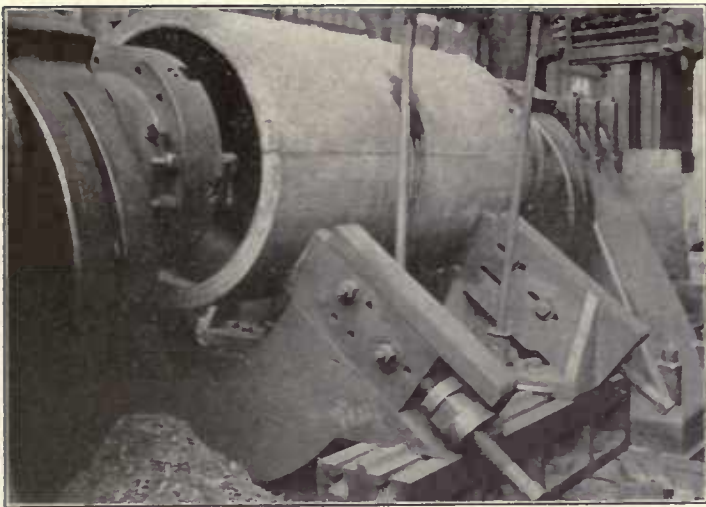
A Cylinder Bushing About to be Clamped Preparatory to Boring.
